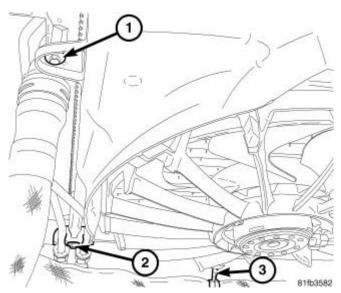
Radiator Fastener, Transmission Cooling Line Retainer Bolt & Radiator Hose Retainer Courtesy of CHRYSLER LLC
